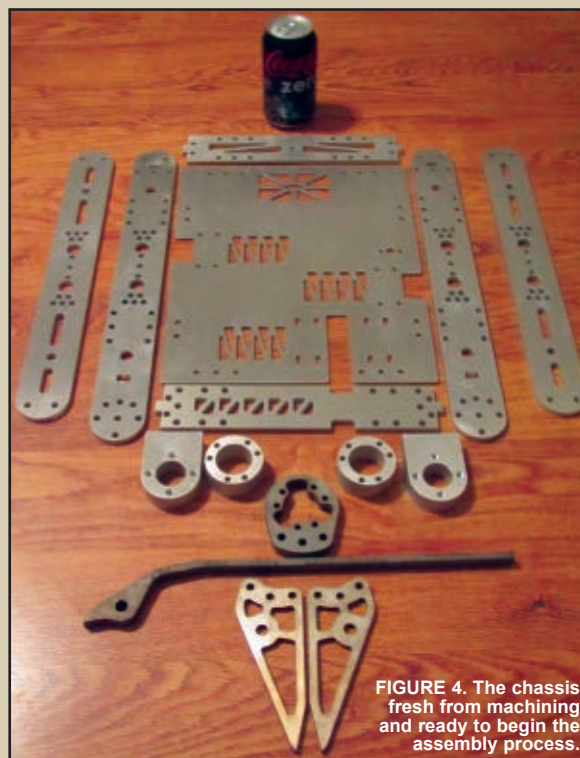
The chassis fresh from machining and ready to begin the assembly process.
